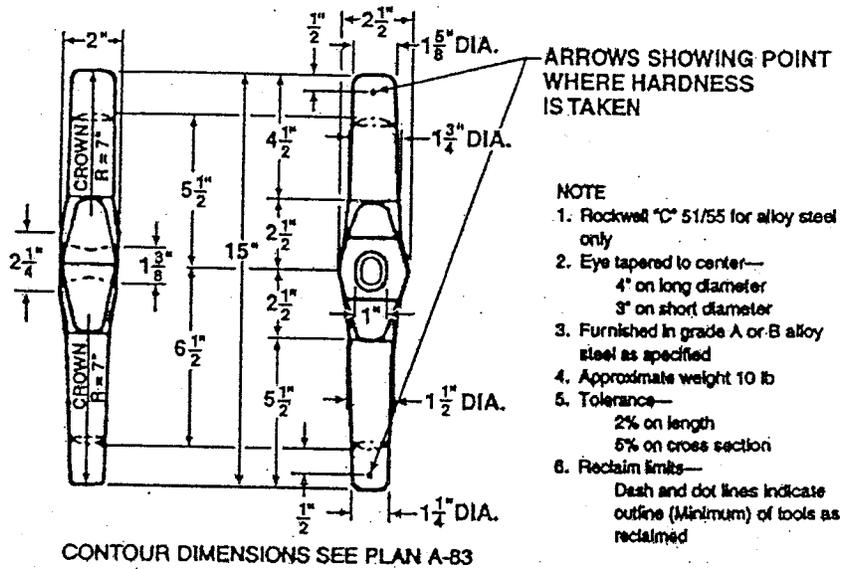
Plan 3-83 - AREMA Spike Maul
